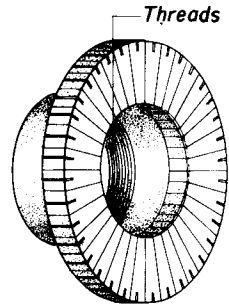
A radial commutator that screws onto the armature shaft.
